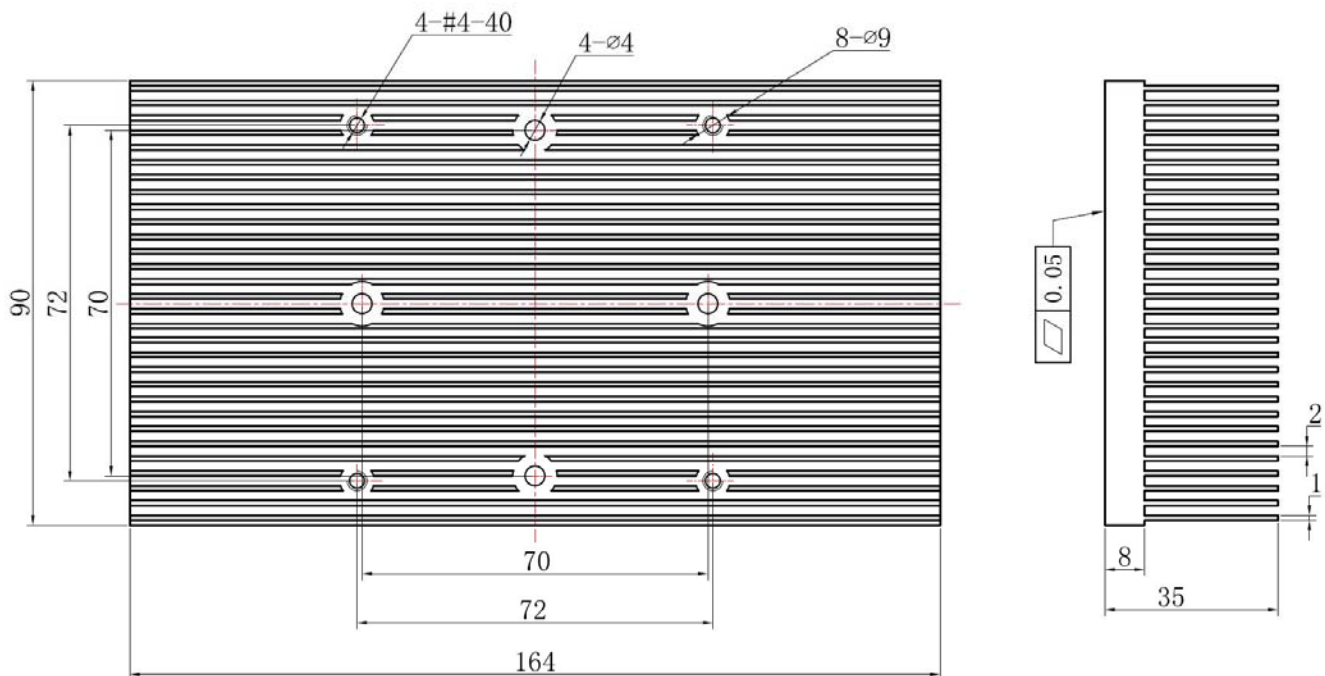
Mechanical Dimensions of Heat Sink ATHS-2/164/90/35H8
